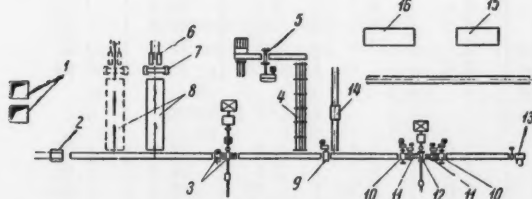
The layout of the mill: 1) Soaking pits; 2) ingot car; 3) universal roughing stand; 4) roller tables; 5) 800 ton shears; 6) pusher; 7) piler; 8) reheating furnace; 9) down-cut shears; 10) coilers in reheating furnaces in front and behind the stand; 11) pulling rollers; 12) four-high finishing stand; 13) finishing coiler; 14) transfer car; 15) and 16) longitudinal and transverse cutting machines.
